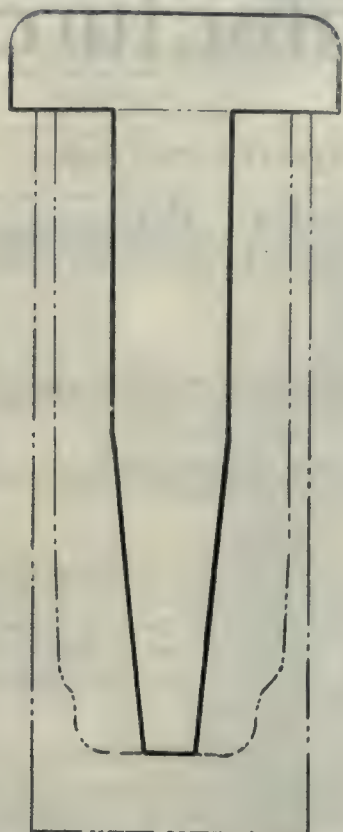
GAUGE TO TEST LENGTH OF SHELL AFTER TRIMMING OPEN ENDS.
